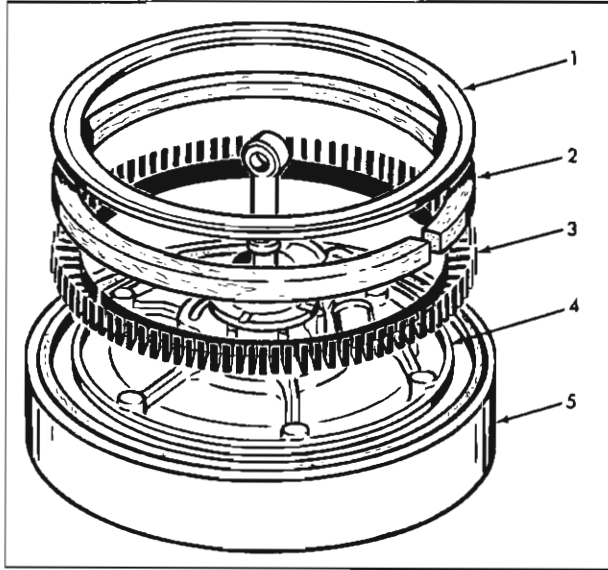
Assembly of Piston Packing, Expander Ring and Felt
